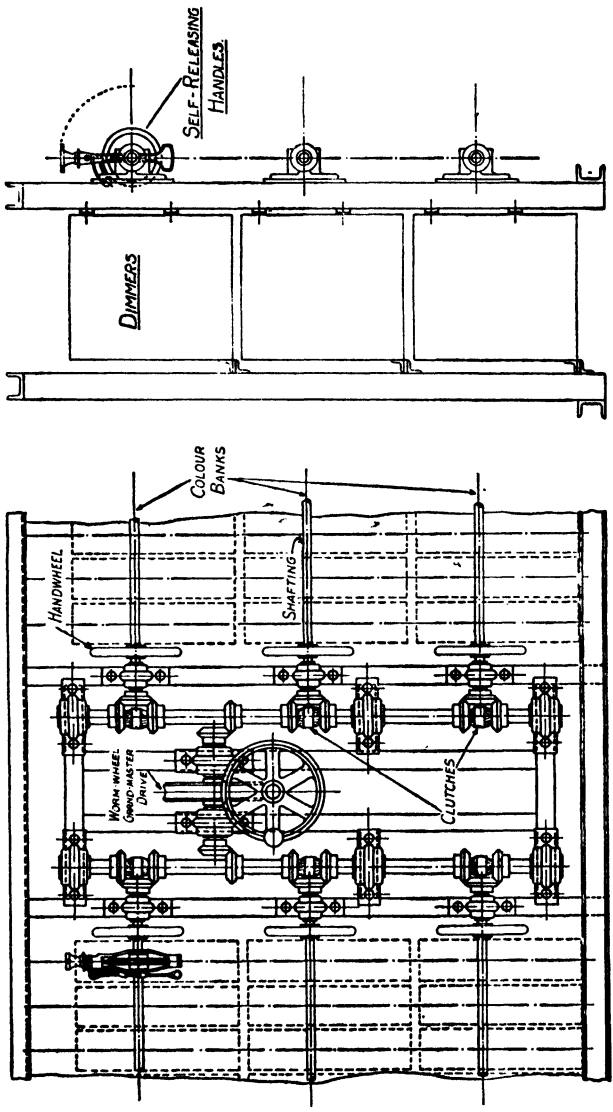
LAYOUT OF GRAND MASTER CROSS CONTROL WITH SPLINE ENGAGED CLUTCHES AND SLIP SELF-RELEASE DIMMER HANDLES
